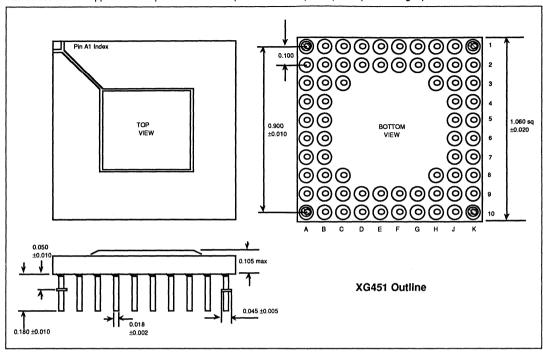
Dimensioned Drawing for the 68-pin PGA Package
